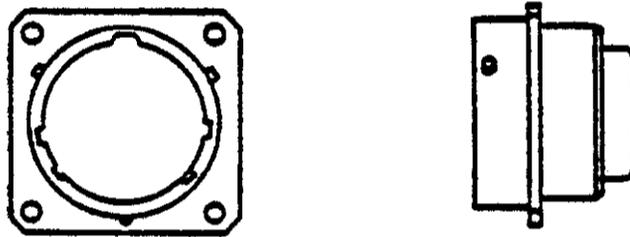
Box mounting receptacle, MIL-C-38999.
